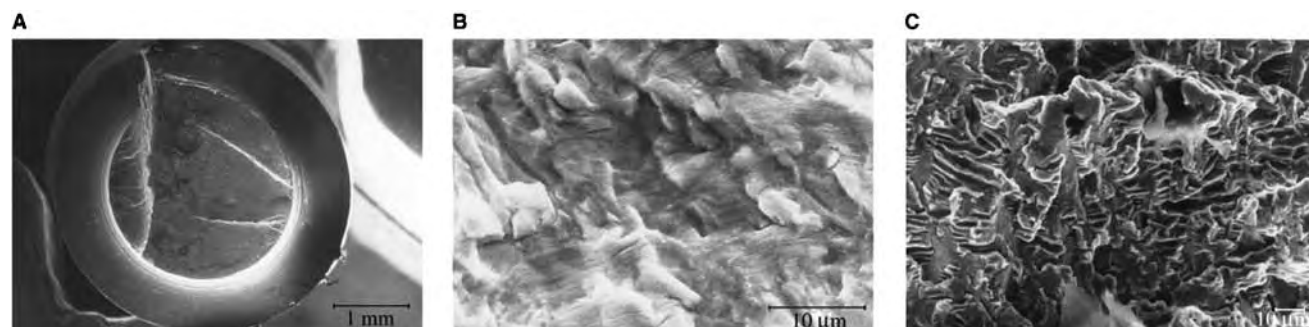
(A) SEM micrograph showing fracture surface of screw B—note chevron marks; (B) higher magnification SEM micrograph showing typical fracture surface morphology; and (C) higher magnification SEM micrograph showing flutes and terraces with feather marks.
